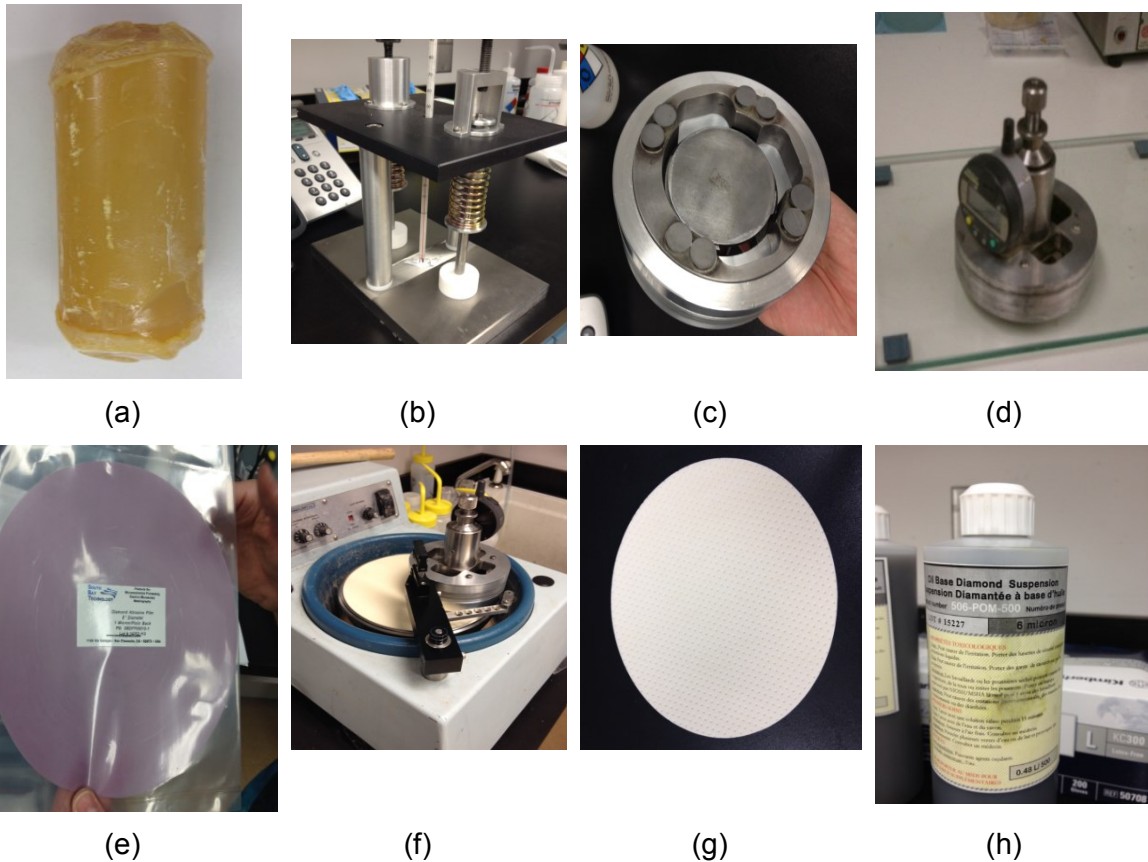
(a) wax for adhering samples; (b) "spring set-up" applying a constant pressure on the sample for keeping top and bottom surfaces parallel; (c) designed jig with its eight supports; (d); designed jig on a flat glass surface; (e) 8-inch silicon carbide discs from Anamet; (f) Lapping and Polishing Machine - Model 920 by South Bay Technology Inc with jig.; (g) perforated polishing cloth from Anamet; (h) oil-based diamond suspension. .
